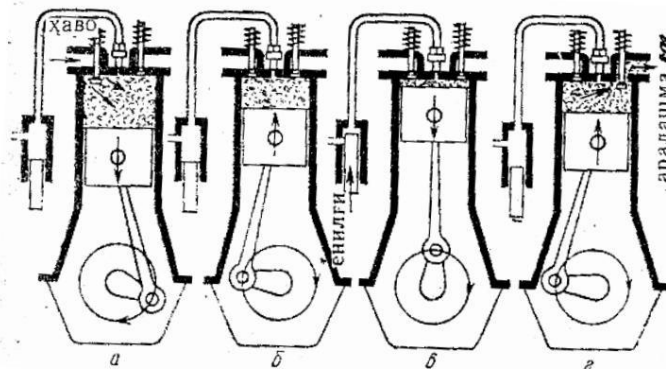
The working process of a four-stroke single-cylinder diesel engine.
